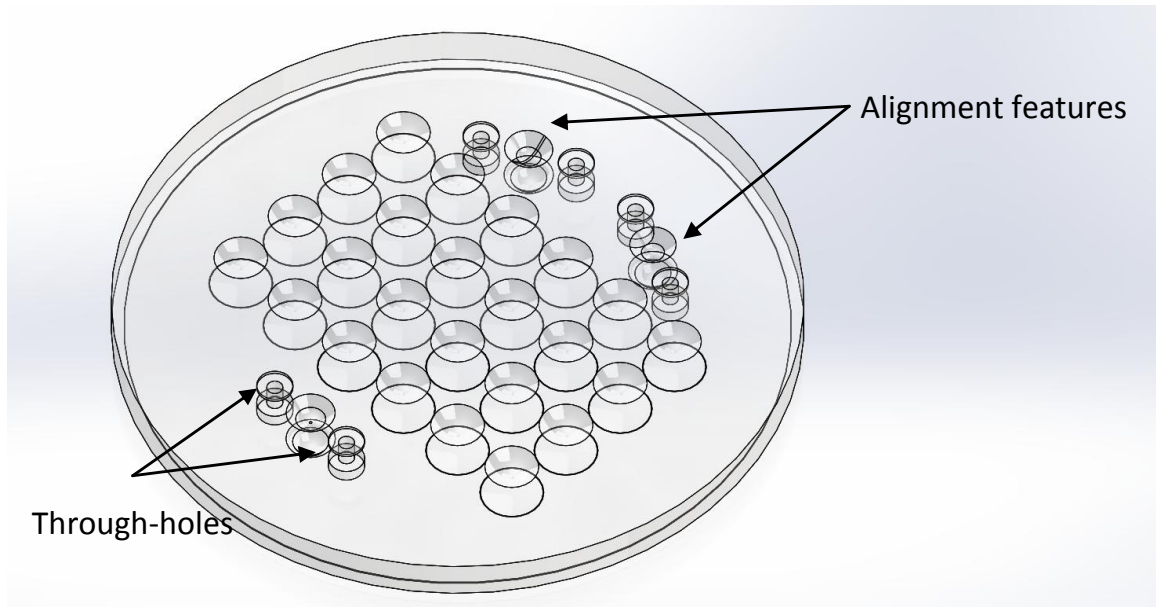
Alternative approach to securing lens array to alignment fixture during lens fabrication: put through holes into the array before micro-milling and bolt the lens array directly to the alignment fixture without a collar.
